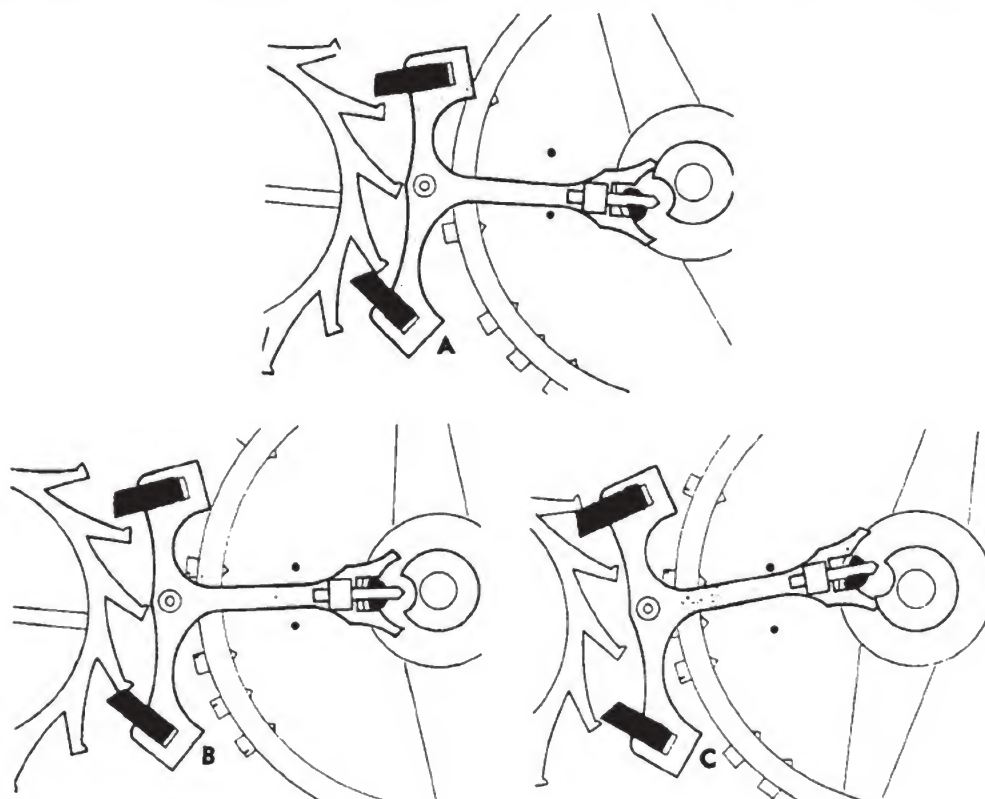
Checking roller jewel shake (with motion of balance wheel reversed). 91.190X
